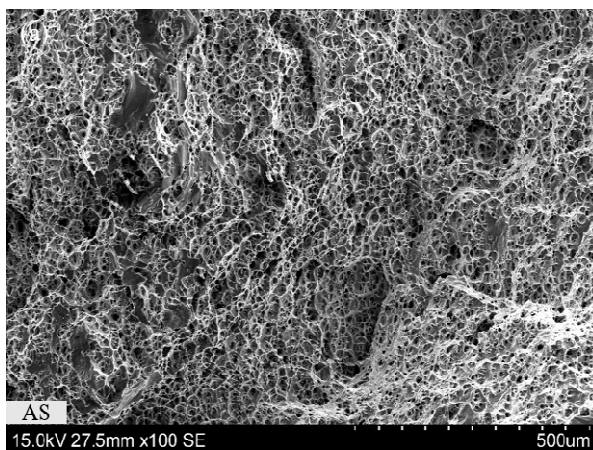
Fracture surfaces of FSW-20A sample showing failure in the HAZ of RS.
